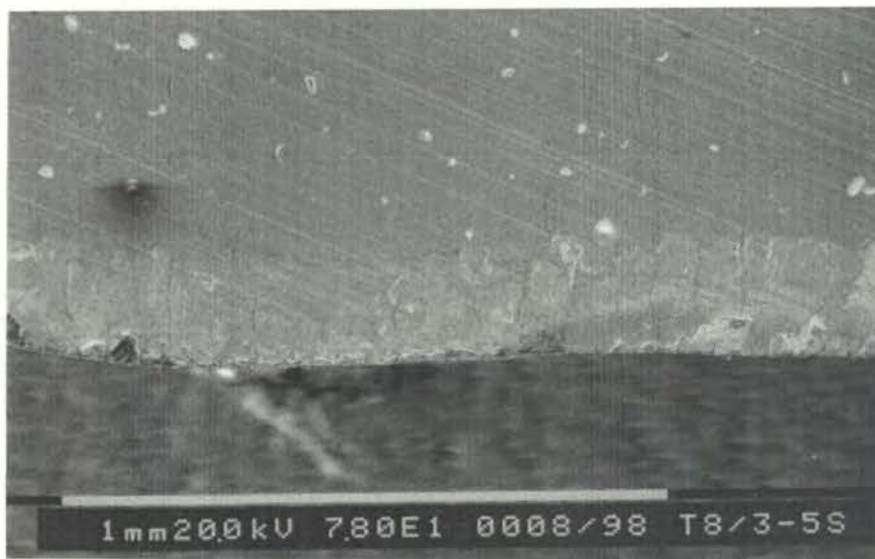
23 SEM image showing coating delamination, chipping and workpiece adhesion on the rake face of KC720 tool after cutting Inconel 718 for 5 seconds at 75 m/min and 0.14 mm/tooth
